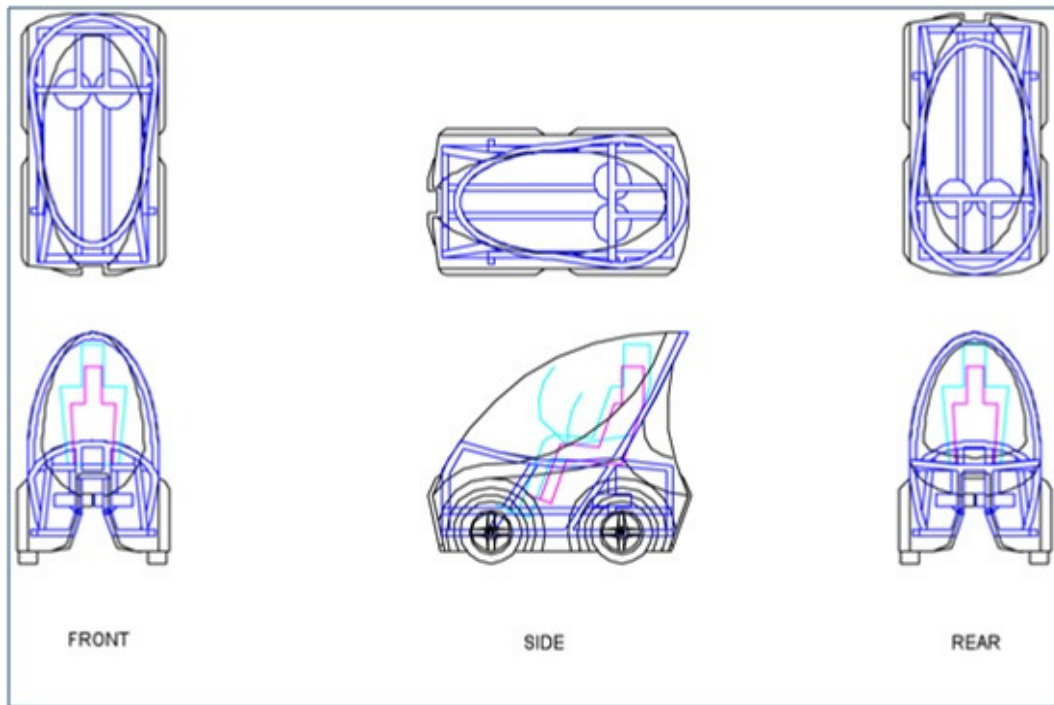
Engineering drawing including body link diagram, chassis structure and overall RUF shape
